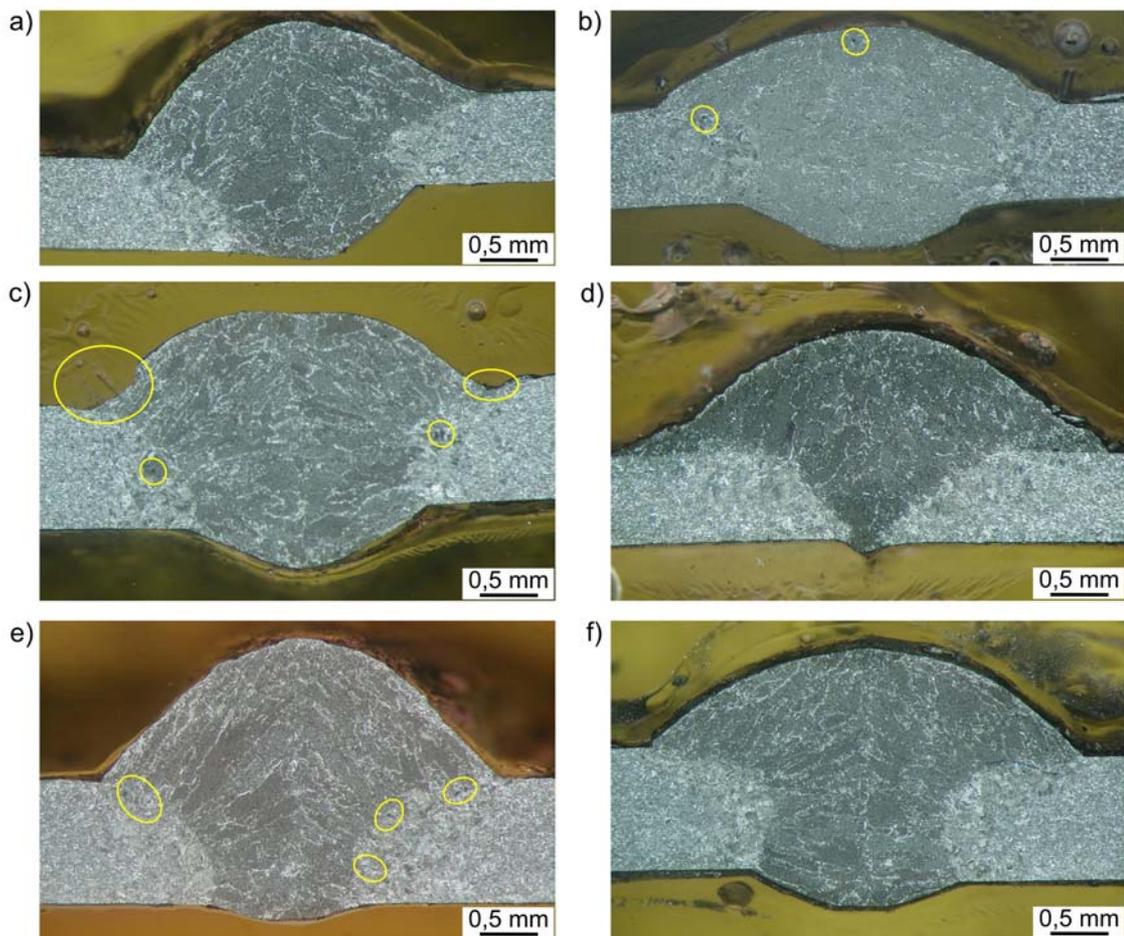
Welding imperfections and lack of shape/dimensional correctness detected during macroscopic examinations
